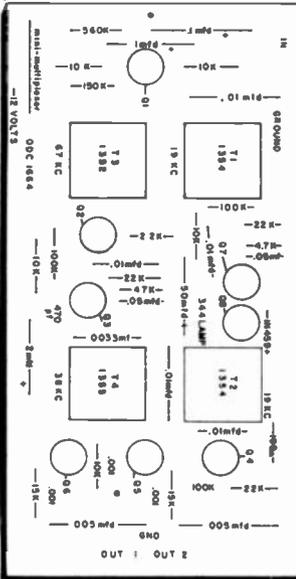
Component side of board shows parts layout. In spite of its miniature size, there is ample space between the components.
